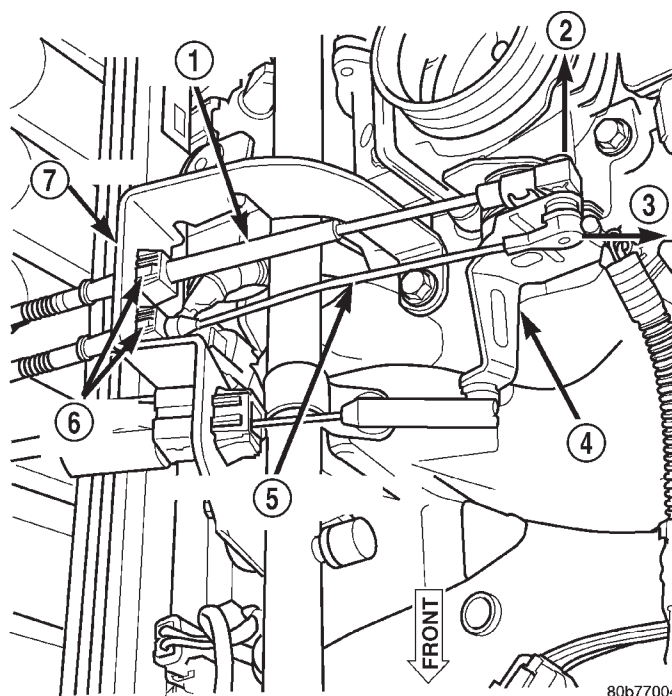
Speed Control Cable at Bell Crank—4.0L Engine
